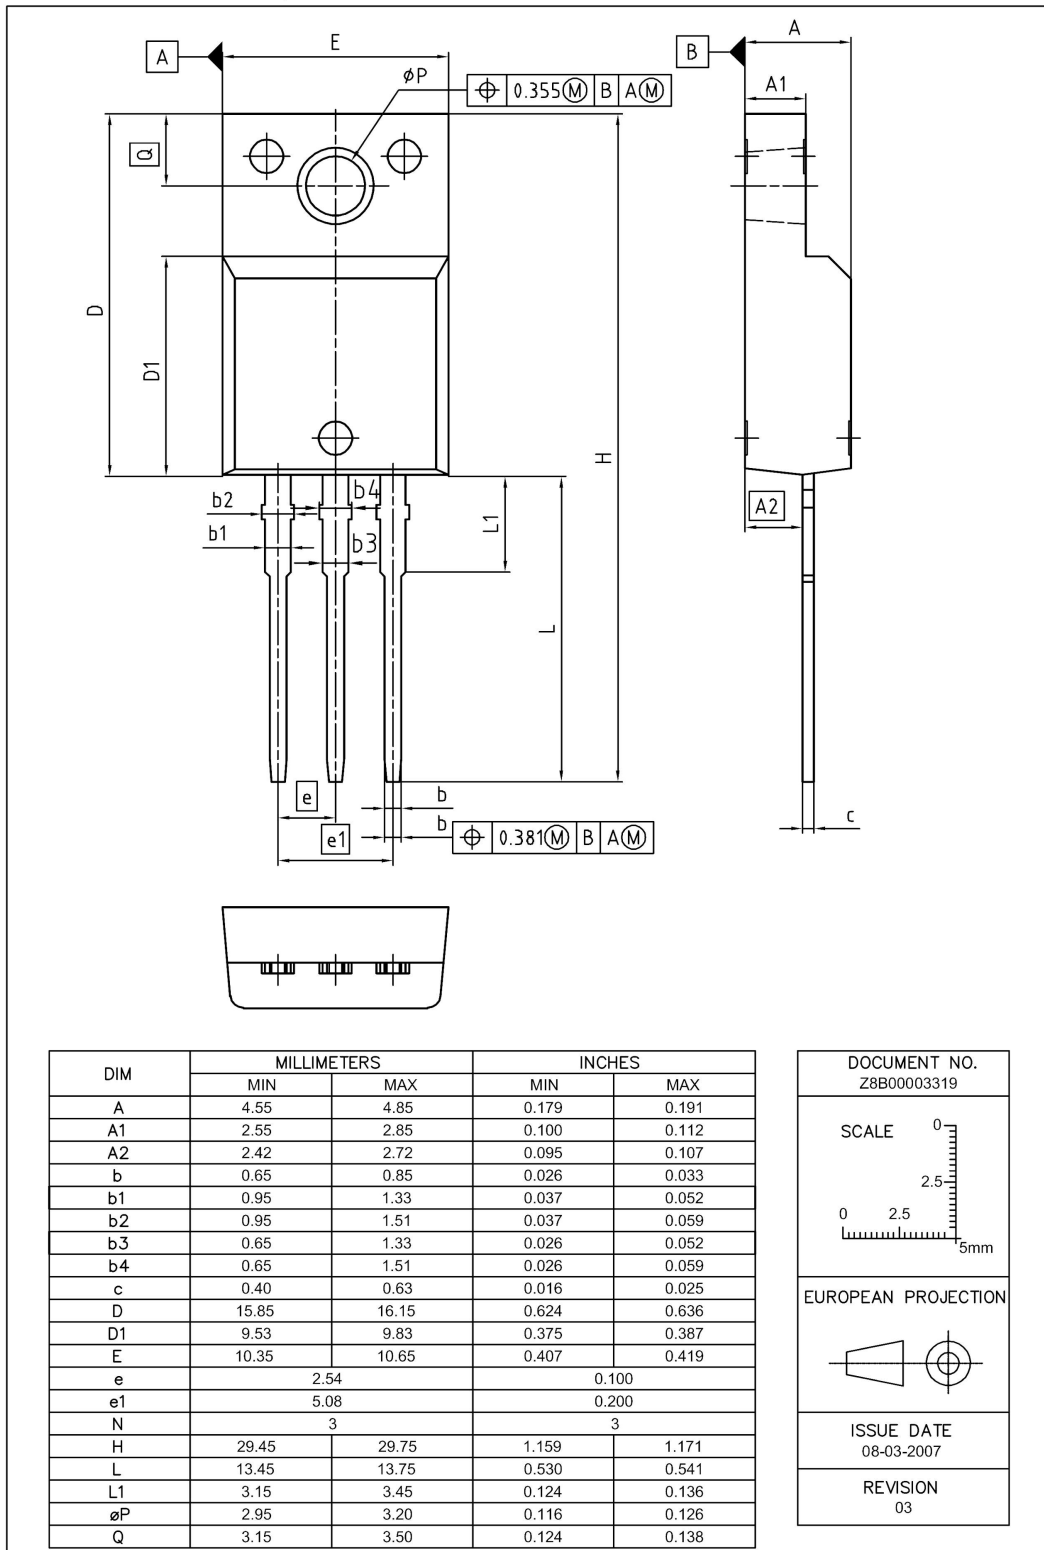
Outline PG-TO 220 FullPAK, dimensions in mm/inches
